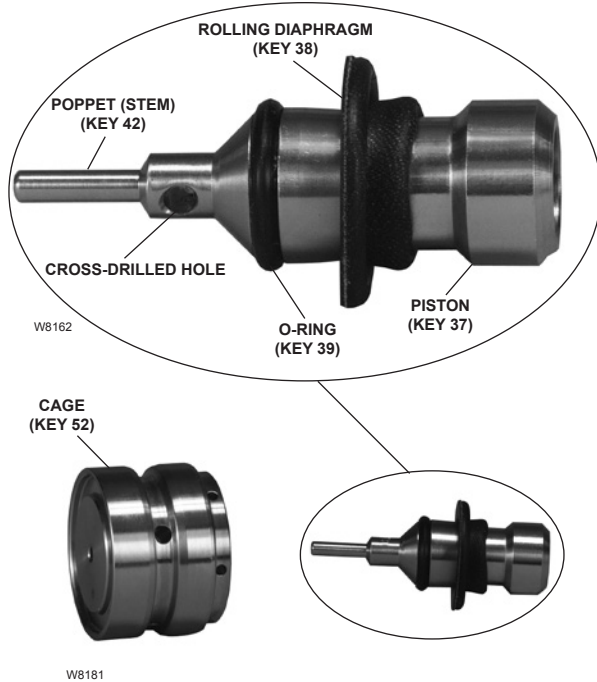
NPS 1/2 / DN 15 Pad Valve Cage Assembly
